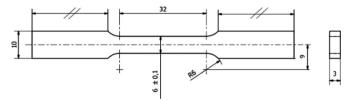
Geometry and dimensions (mm) of the tensile specimens.
